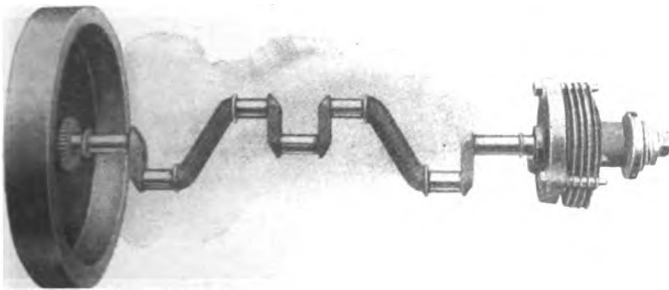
Stevens-Duryea Fly Wheel, Crank Shaft and Disc Clutch.
